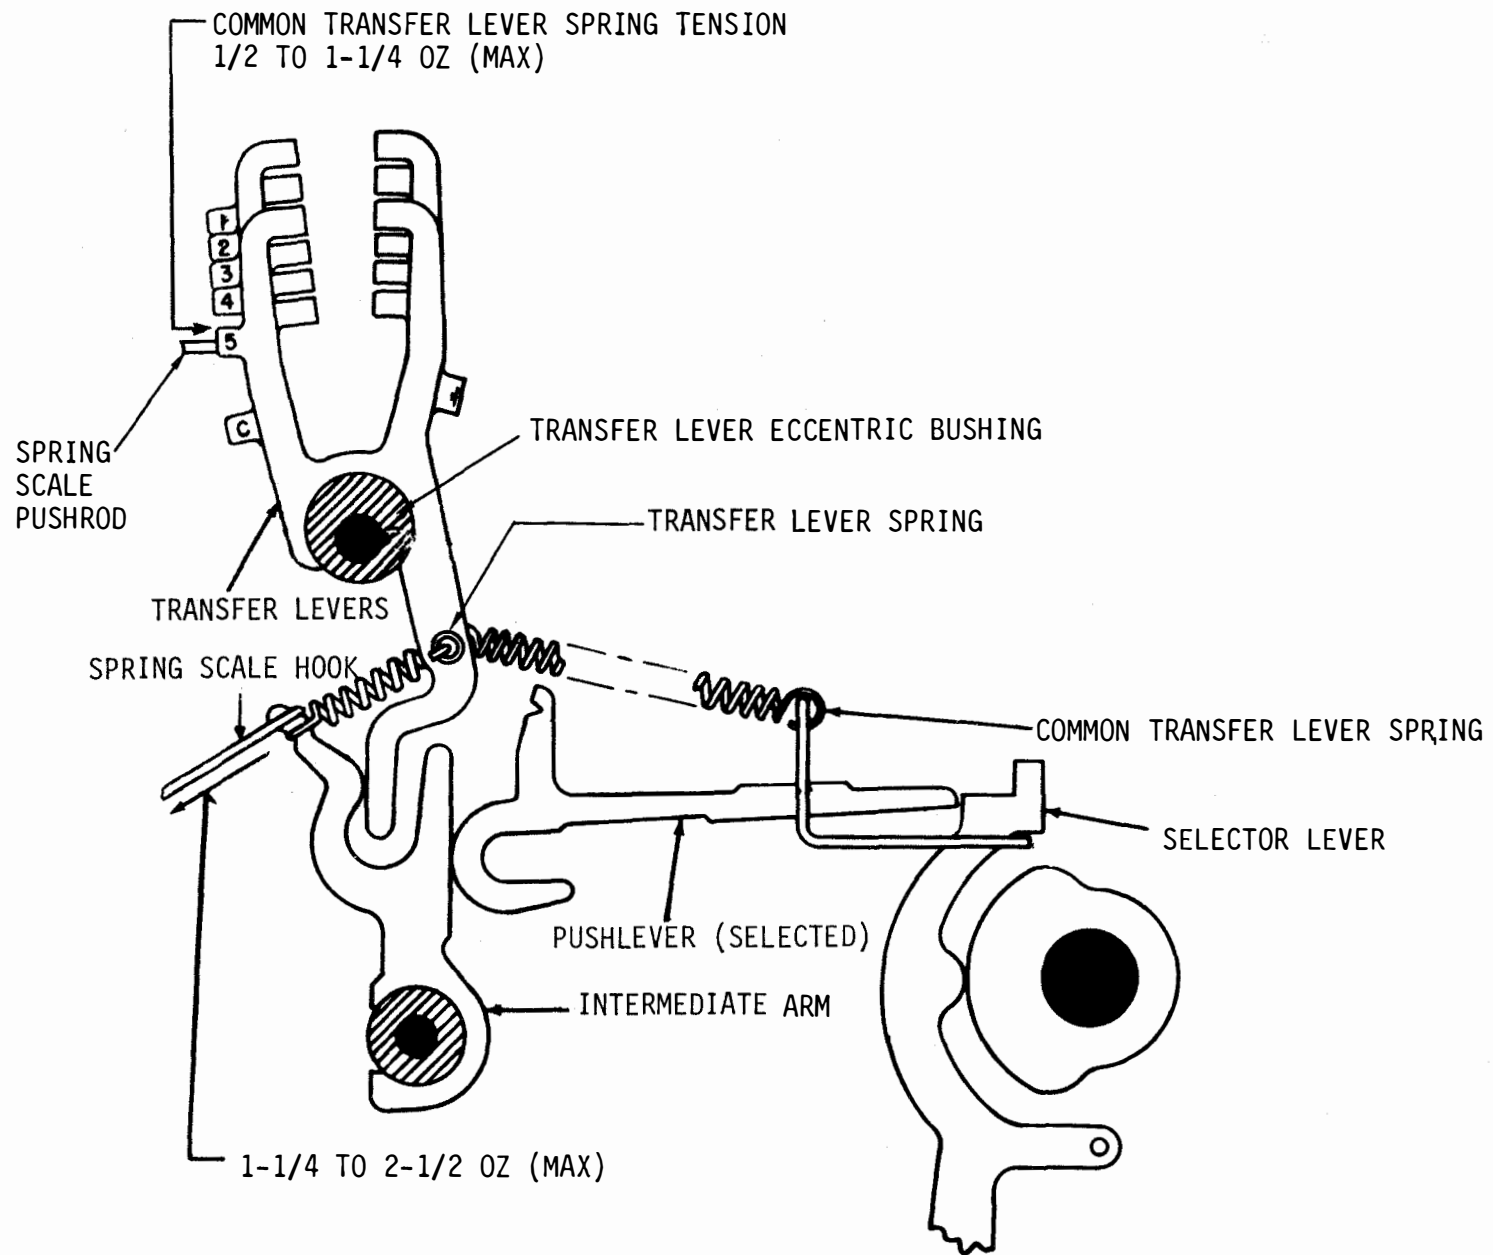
Common Transfer Lever Spring, and Transfer Lever Spring, Right Side View
